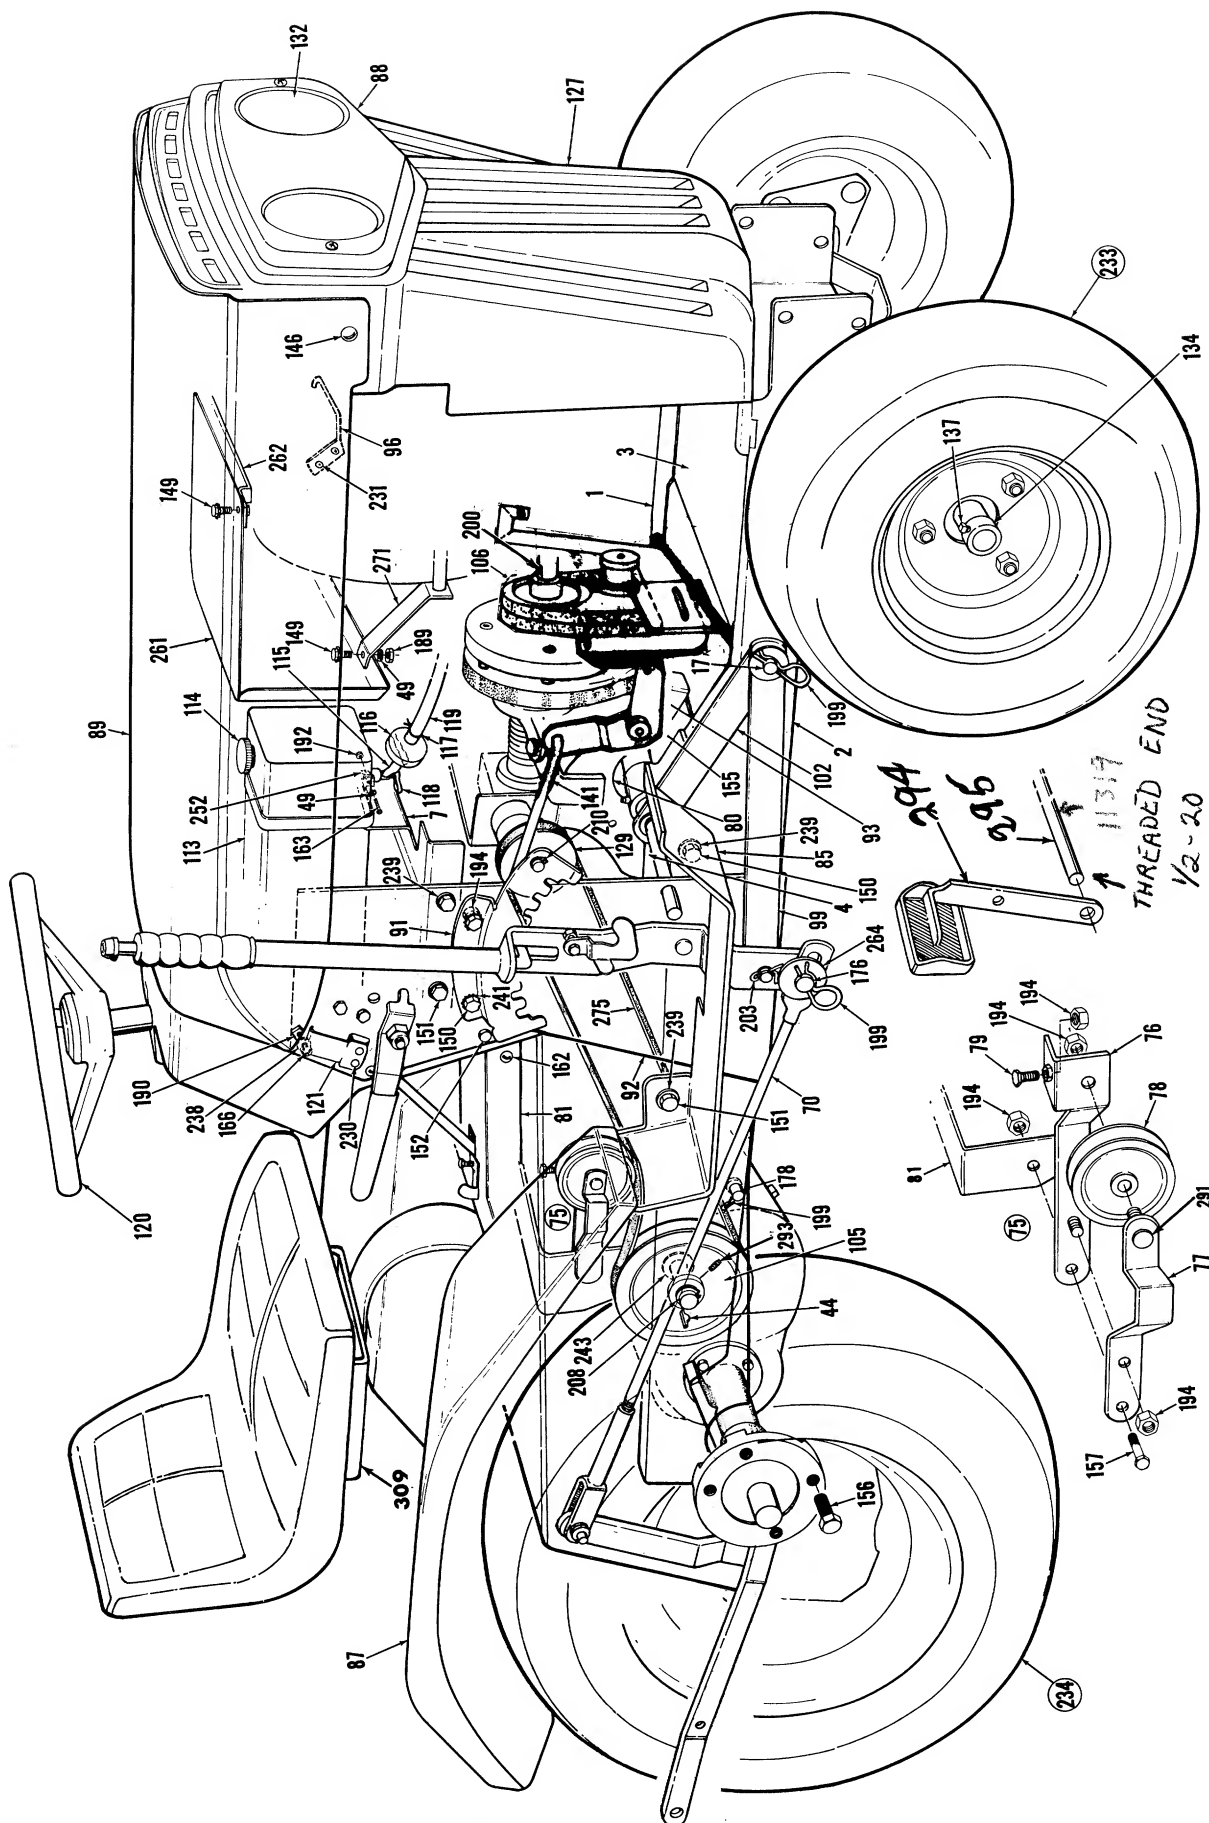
RIGHT HAND SIDE OF TRACTOR
